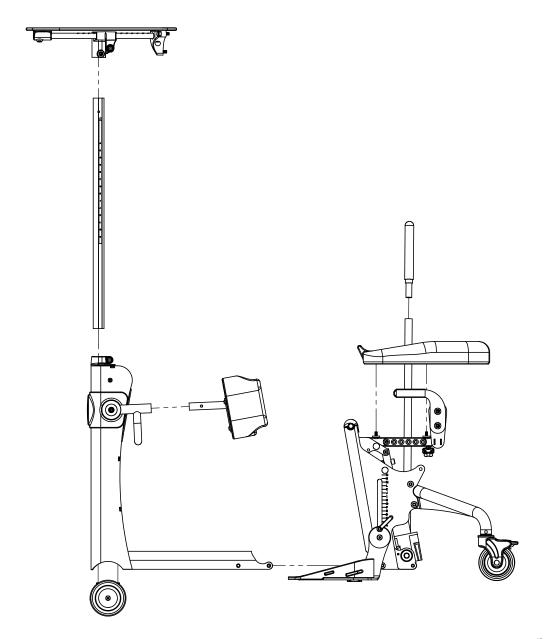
Install the table arm rest to the unit with the two bolts attached. Tighten bolts securely.
